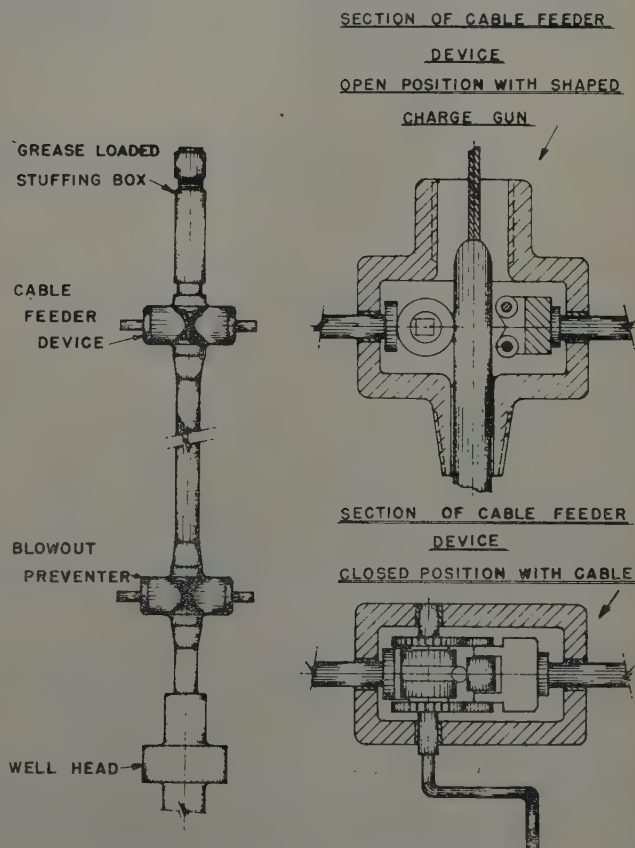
ARRANGEMENT OF CABLE FEEDER.
